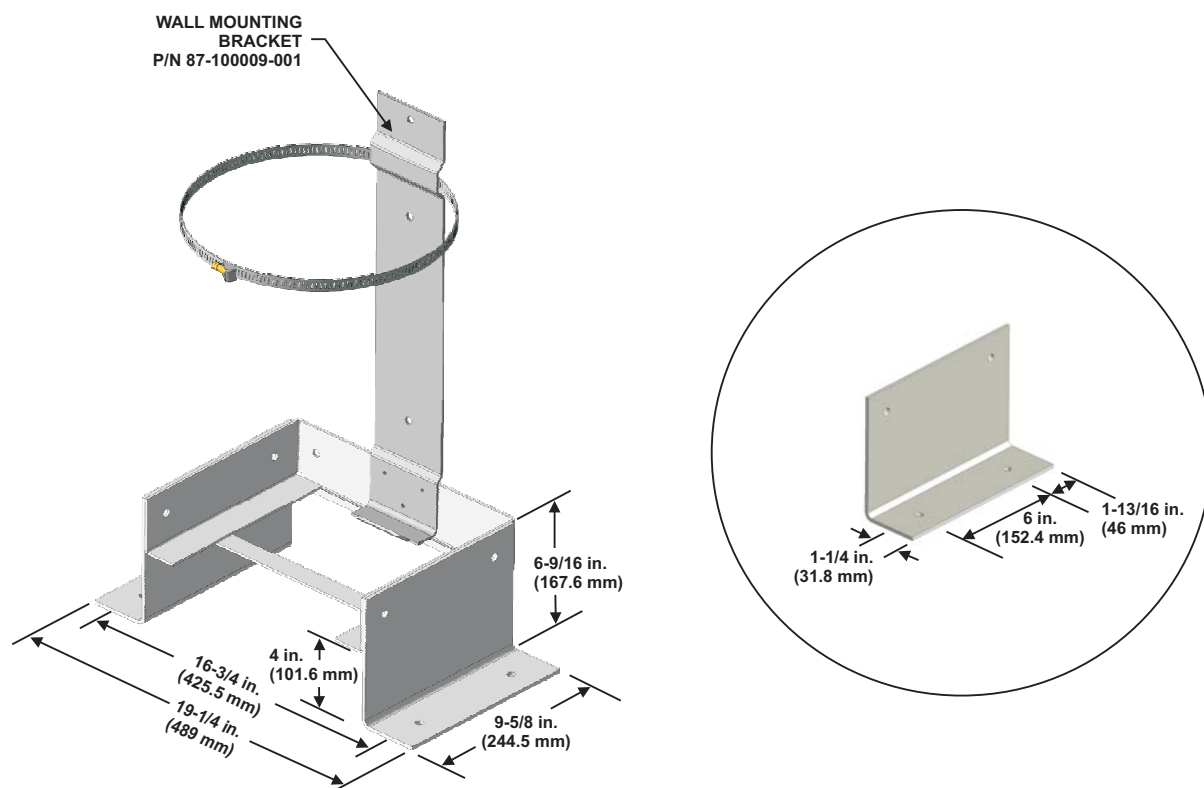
Floor Mount Bracket Kit Attached to Wall Mounting Bracket
